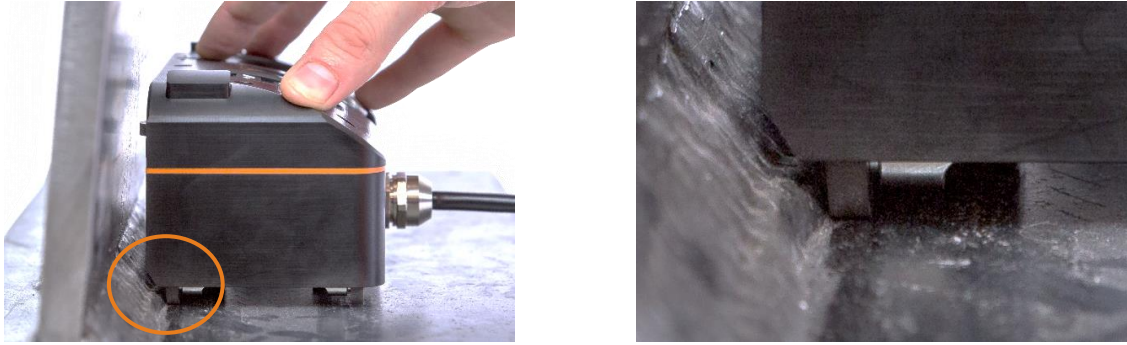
Probe guiding wheels leaning against weld toe
